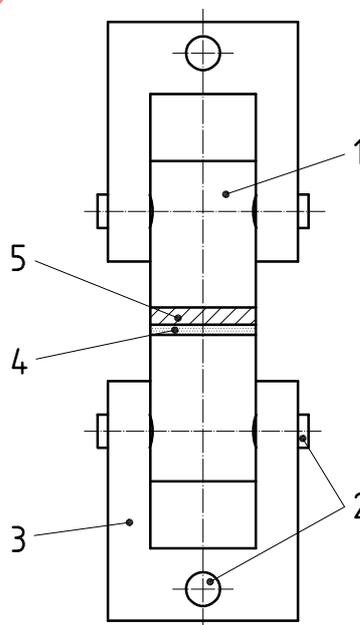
Illustration of loading assembly which minimizes off-axis loading
